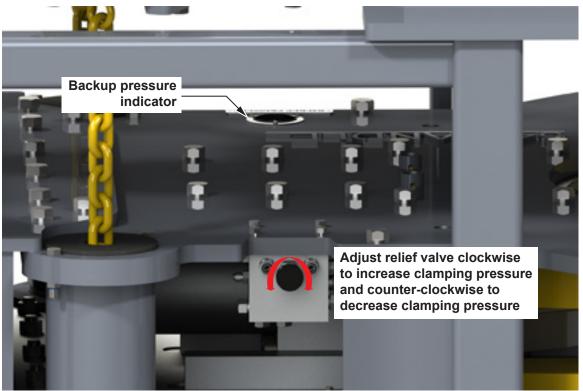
Lockjaw Backup Clamp Pressure Adjust
